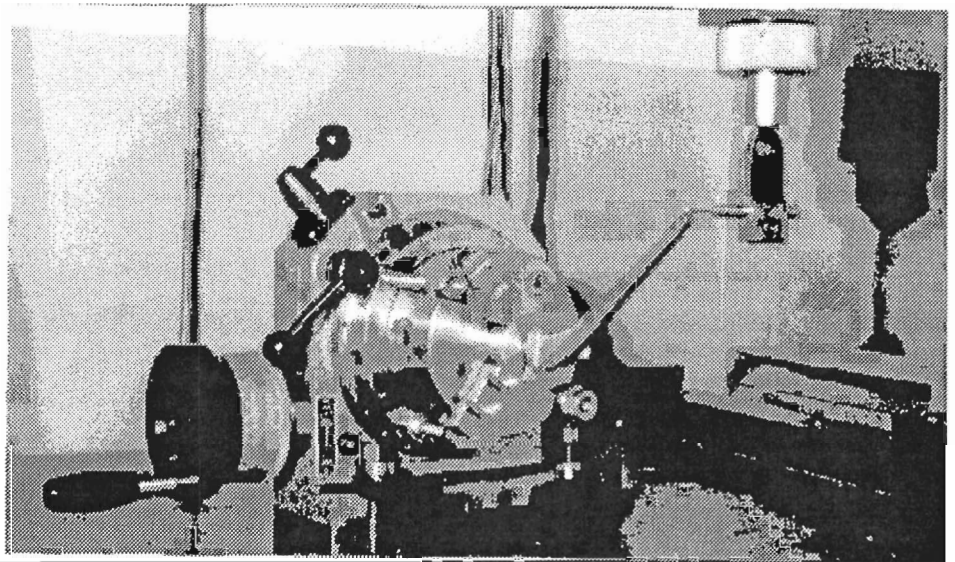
Measurement of machining accuracy of the endoprosthesis on the CMM
